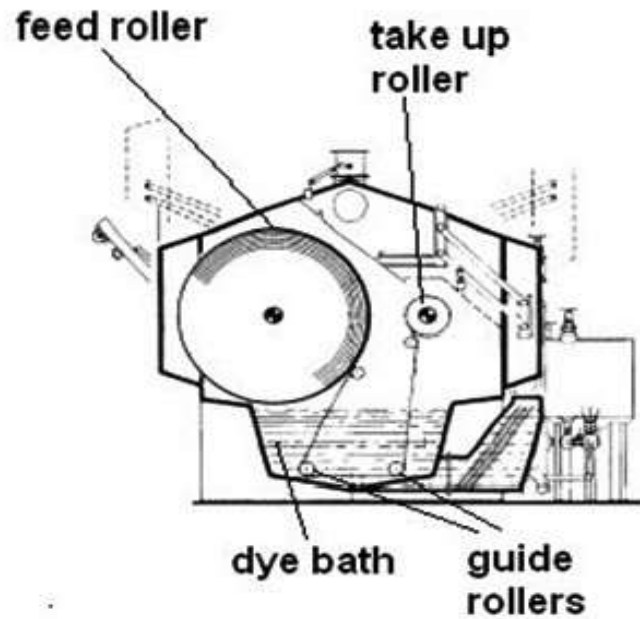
(b) Silent Features of Jigger dyeing machine
